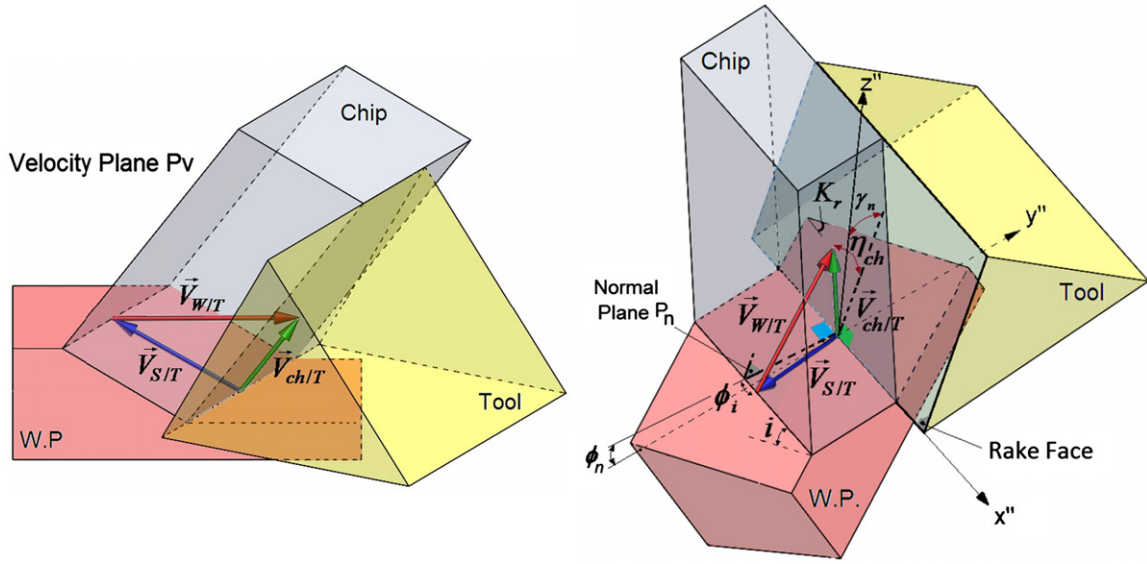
Cutting mechanism in oblique machining (3D elements of the workpiece, chip and cutting tool).
